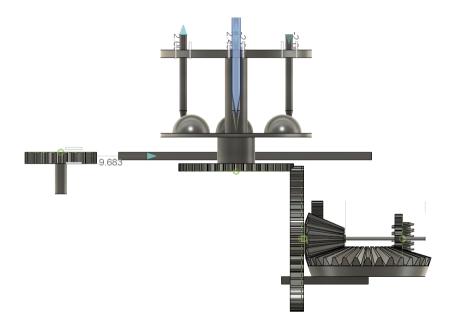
Side view of the CAD model highlighting bevel gear interaction.
